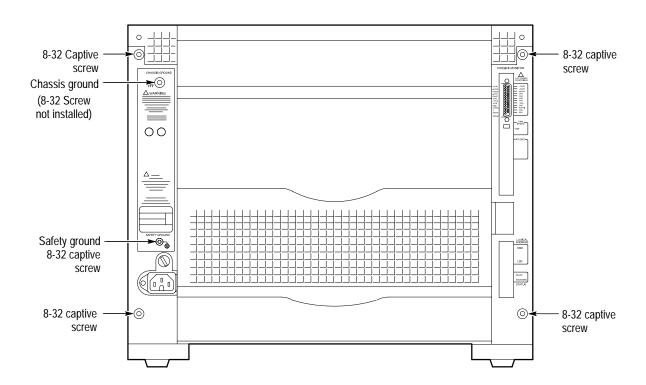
Location of blower assembly screws on the rear of the chassis
